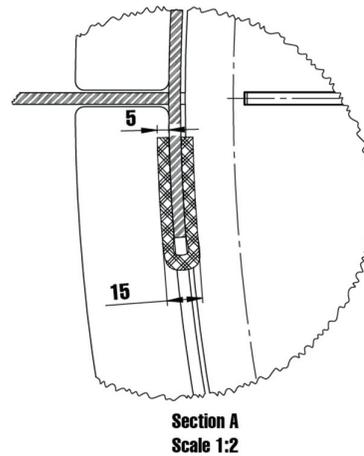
Rubber protective layer onto the edges of the side holes of the cradle
